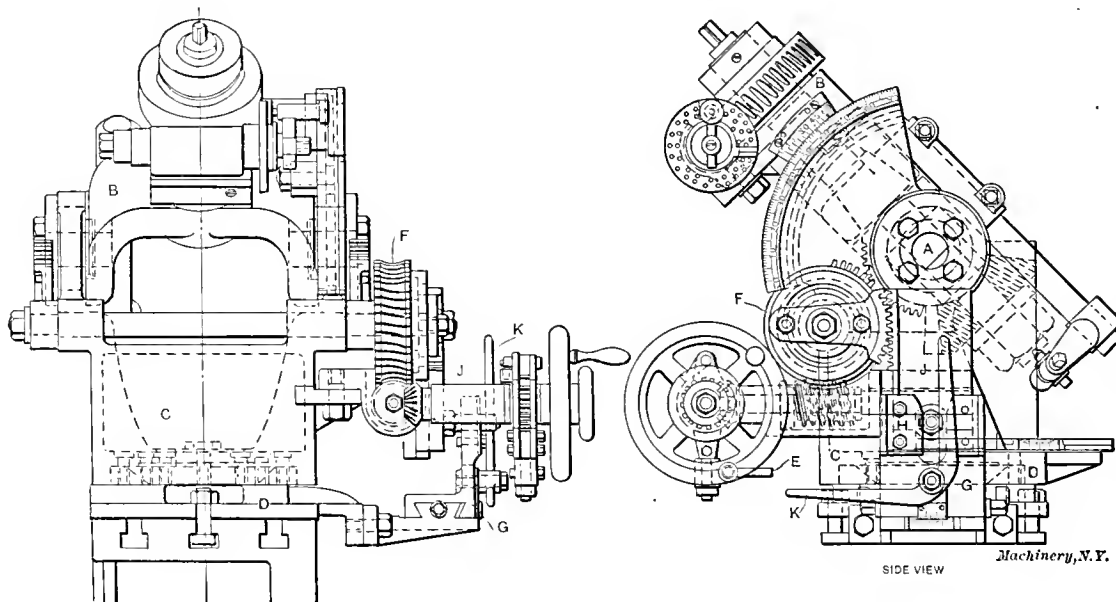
Rear and Side Elevations of the Bevel Gear Shaper Attachment shown in Fig. 148.
